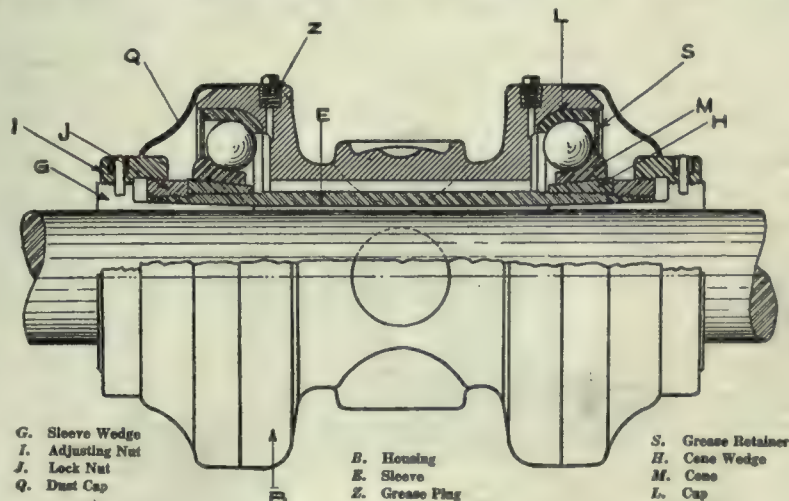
SECTIONAL DRAWING OF BALL-BEARING SHOWING DETAILS CONSTRUCTION.
